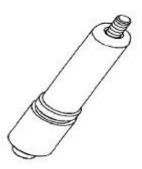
CRANKSHAFT LOCKING TOOL - VM.9992 Courtesy of CHRYSLER LLC
